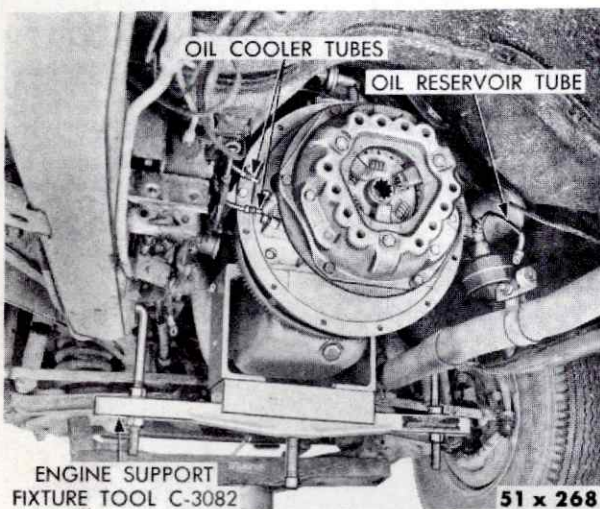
Engine Support Fixture in Place (Tool C-3082)
